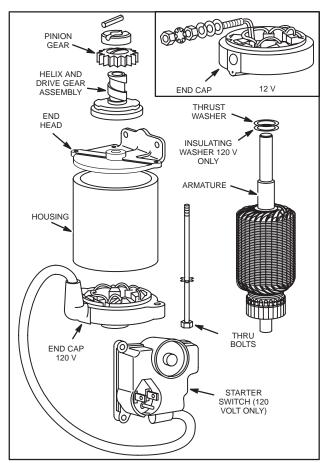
12 VOLT & 120 VOLT STARTER MOTOR - EXPLODED VIEW
